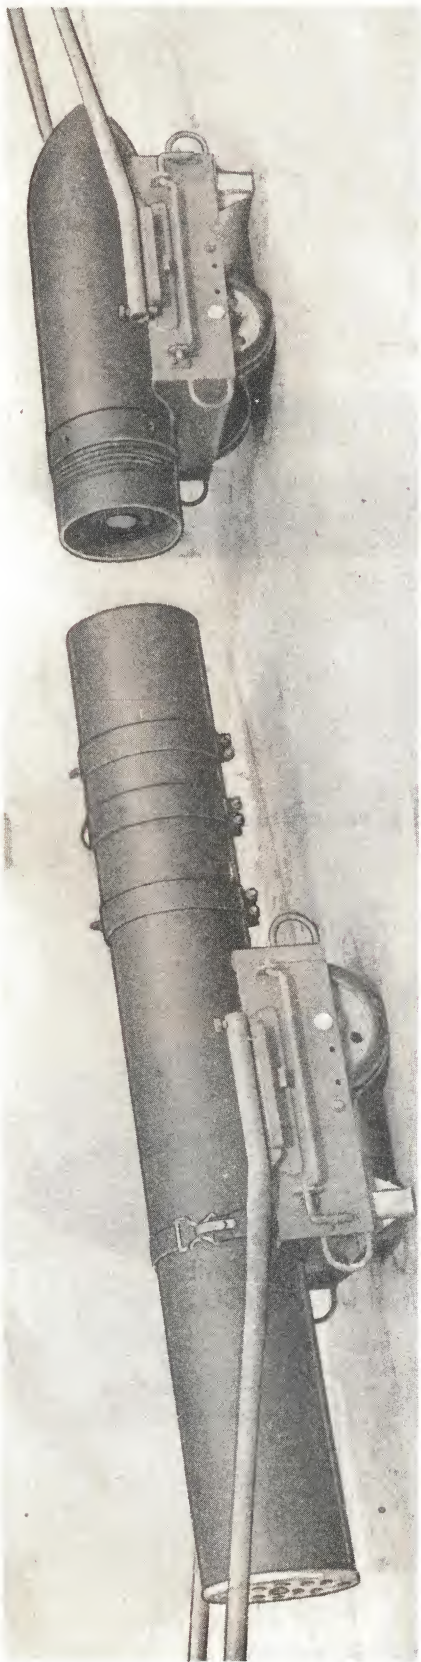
Head and Motor on Bomb Skids Mk 1 Mod 1—Ready for Assembly
